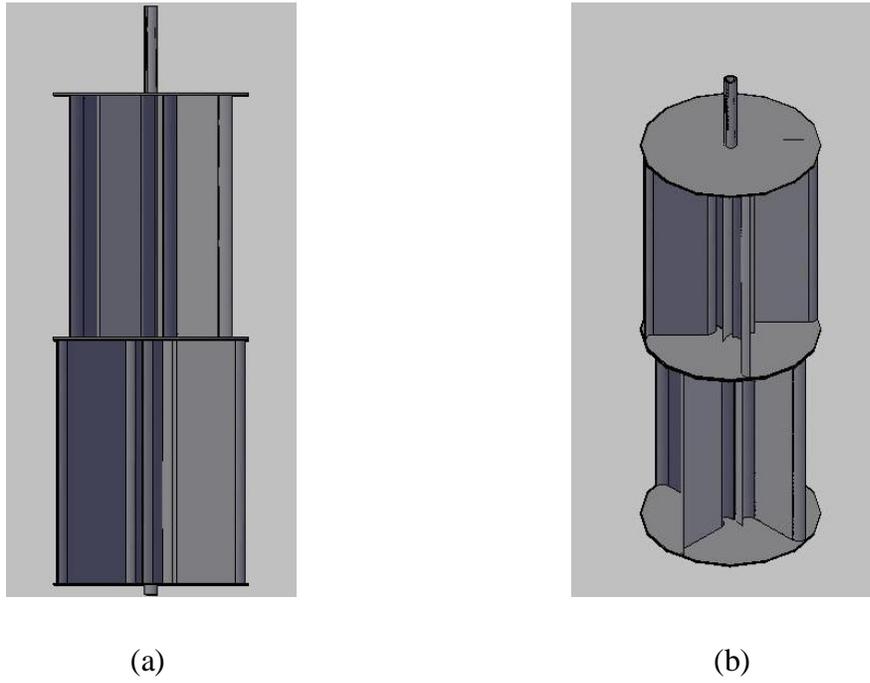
3D view of final design (a) Front view, (b) Isometric view
